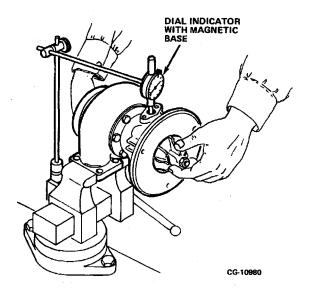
Checking Radial Shaft Movement with Compressor Housing Removed
